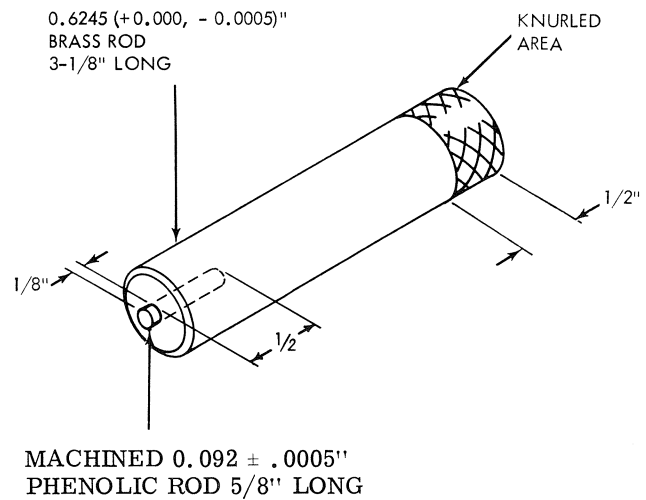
SOUND DRUM LOCATING PLUG T-38001-G
